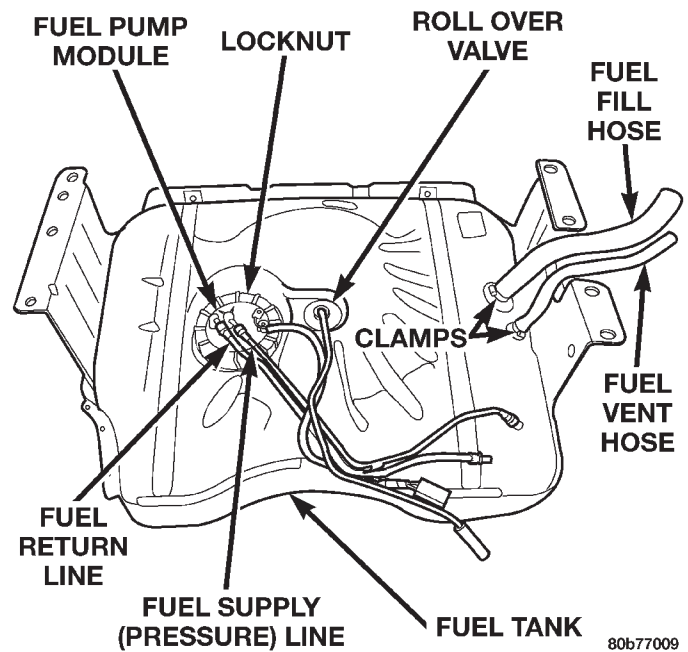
Fuel Tank/Fuel Pump Module Location (Top View)
